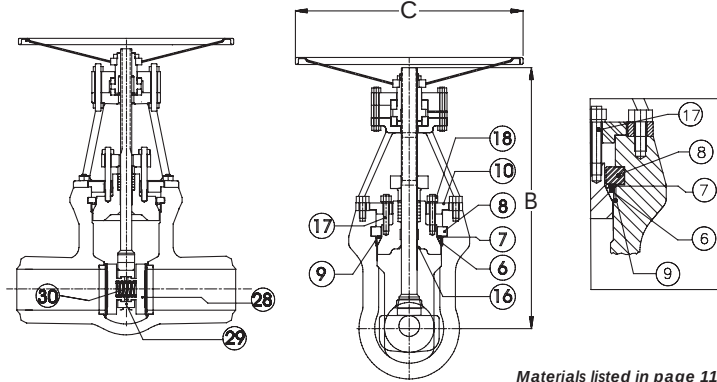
B-F Flex Wedge, Butt Weld Ends
